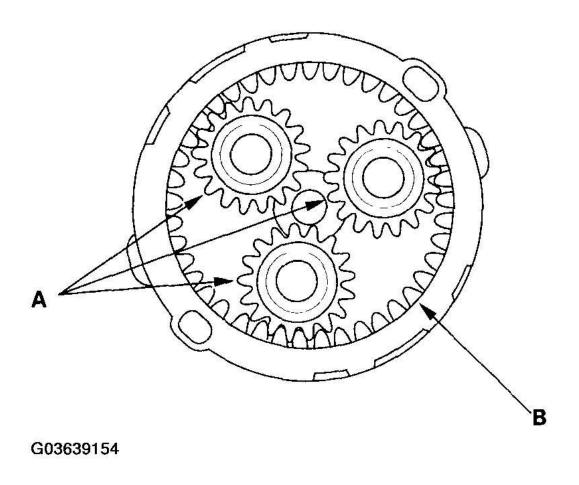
Checking Planetary Gears And Ring Gear Courtesy of AMERICAN HONDA MOTOR CO., INC.
